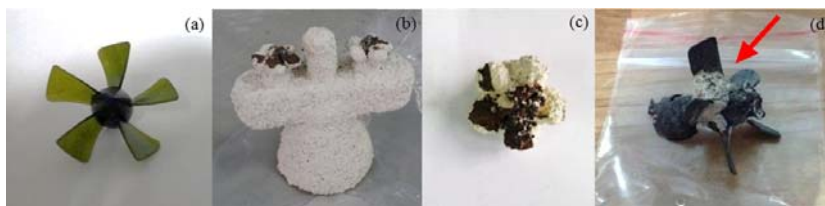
(a)-(d) Printed wax resin product, completed shell casting, and product of casting at a temperature of 1700 °C
